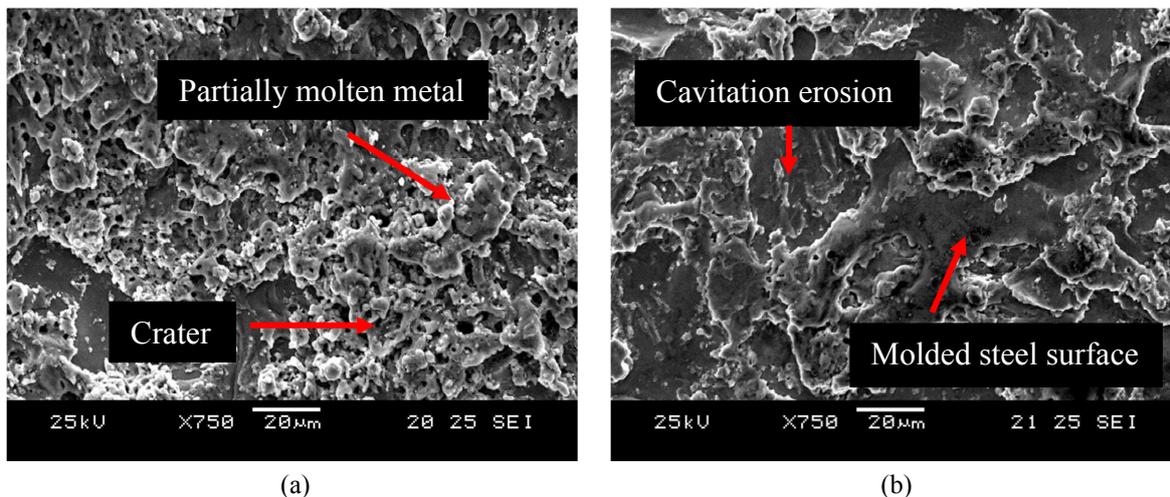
(a) EDM cut surface of SAE 304 stainless steel (b) surface after USM at T=10°C
